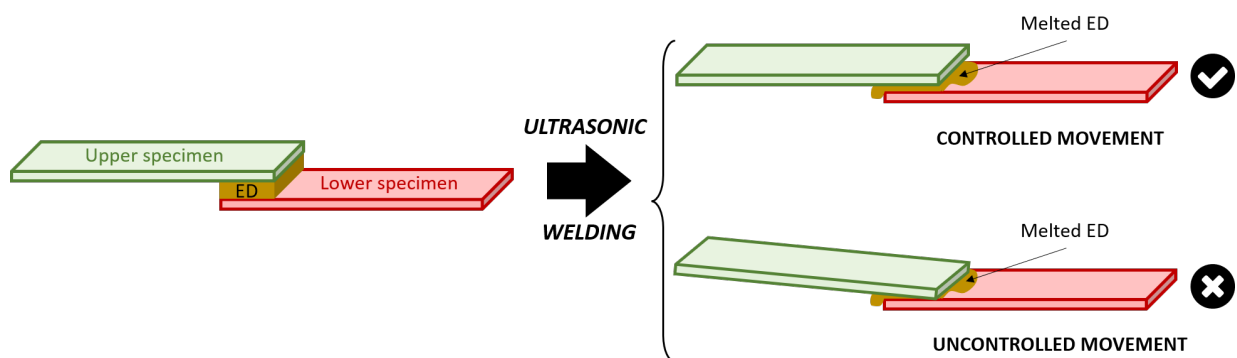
Movement of the upper specimen due to the melting of the ED during welding
